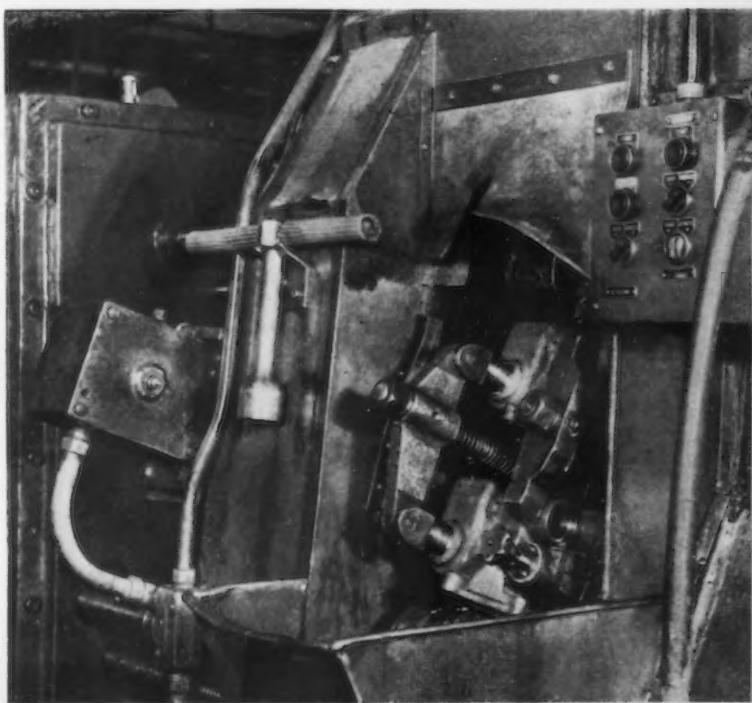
In the second set-up, two castings are clamped at a time at each station, locating from the previously bored bearing. Adjustable V-block support is given the extended bearing barrel by the star-wheel adjustment, before the clamp on the right is tightened.
